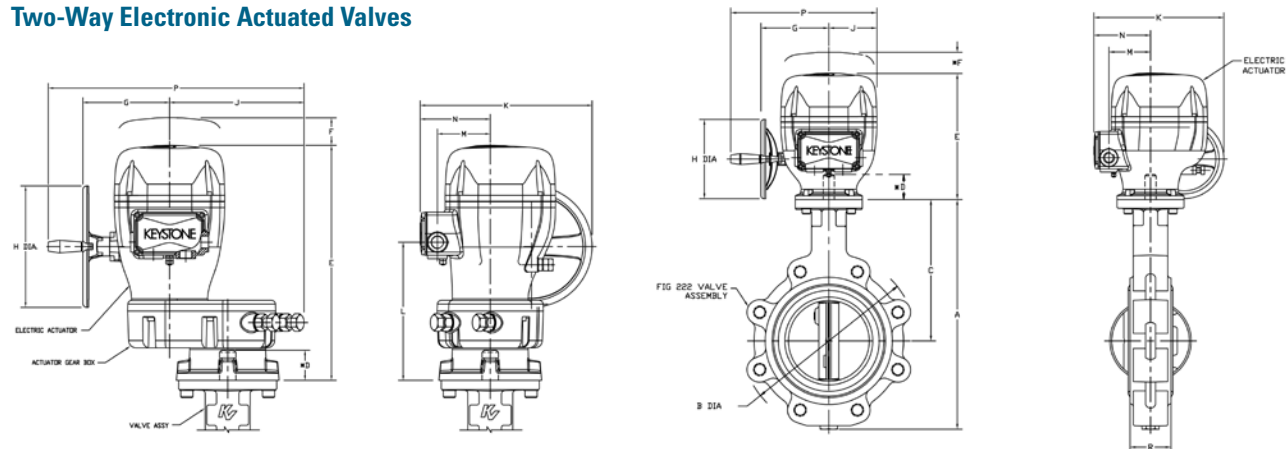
Two-Way EPI₂ Electronic Actuator Valve Assemblies
